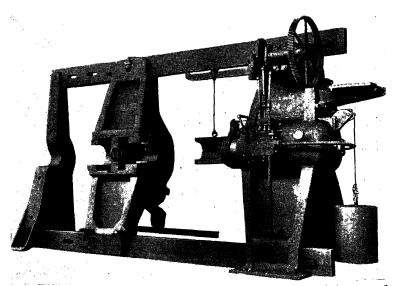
Hydraulic press. This press is specially adapted for press-fit work such as putting locomotive drive wheels on their axles. It will put on a wheel and remove it. Usually it is equipped with an indicator so that the operator can determine whether the fit is proper by observing the resistance to movement. (Chambersburg Engineering Co.)
